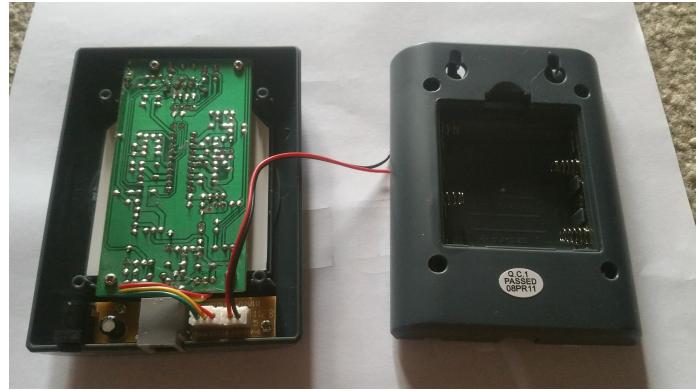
The parking sensor once the screws have been removed revealing the primary printed circuit board
